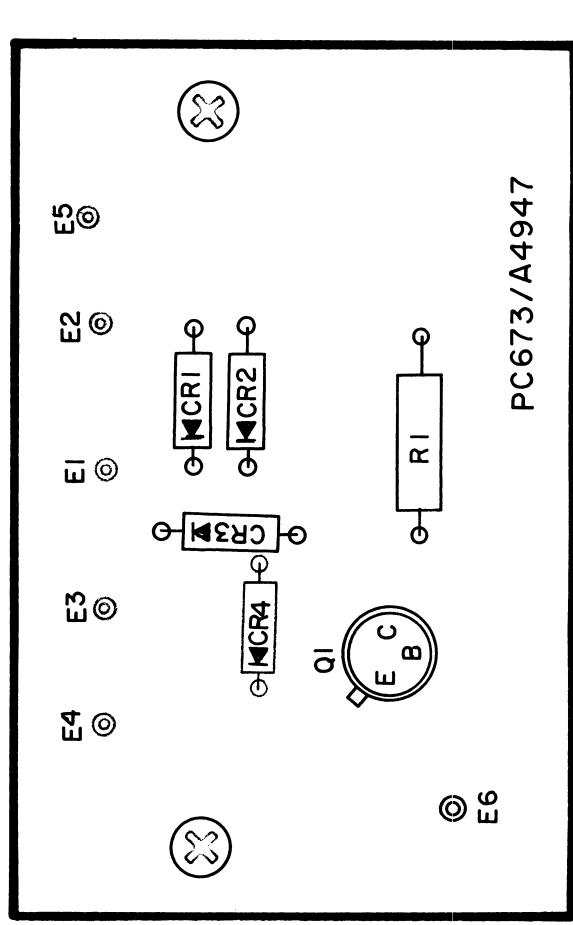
Oscillator Relay Control Assembly Z110, Component Location and Parts List
